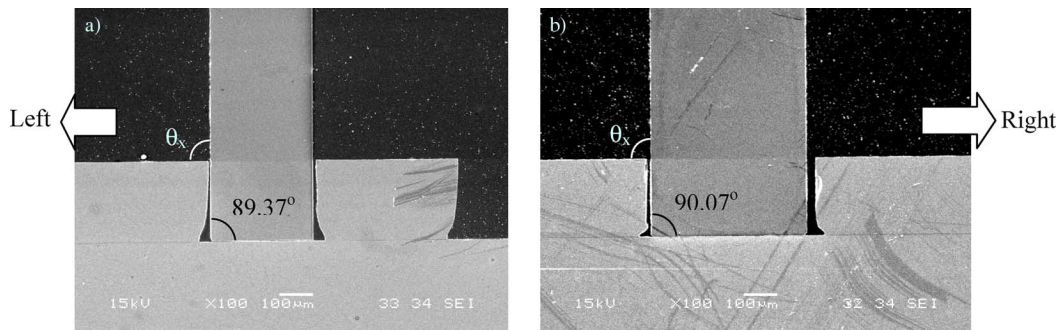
Cross section view of a mirror assembly on SiOB made of SOI wafer (a) sample A and (b) sample B.
